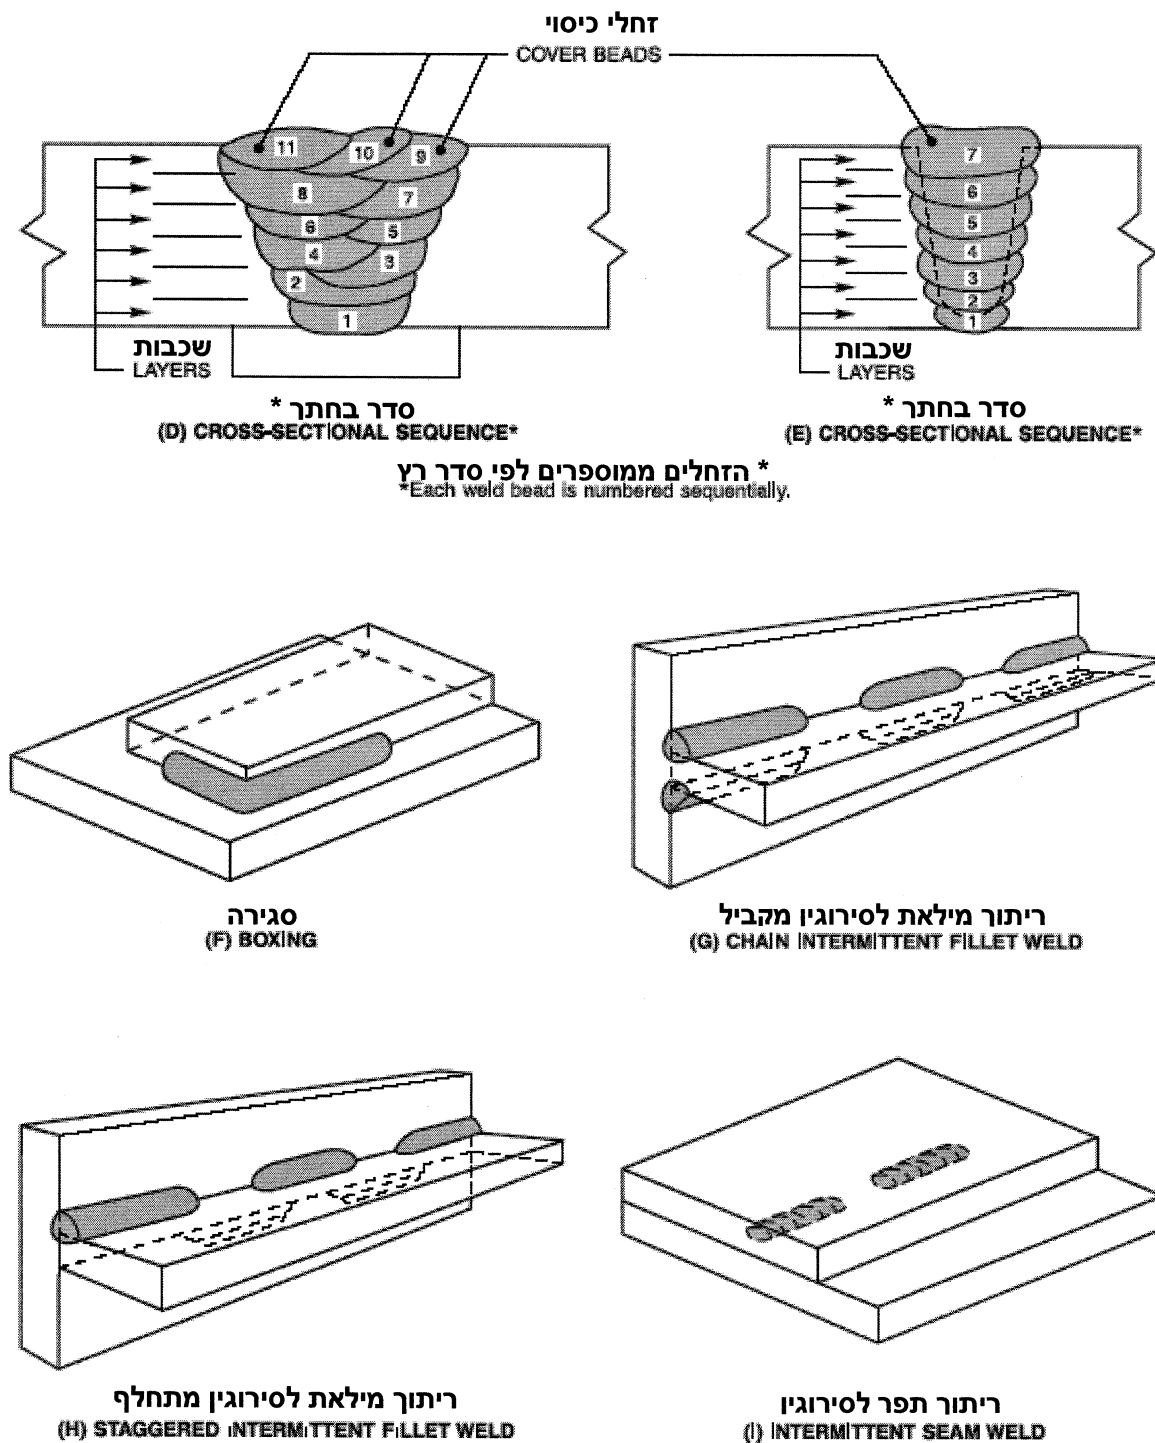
(Continued)—Welding Application Nomenclature
